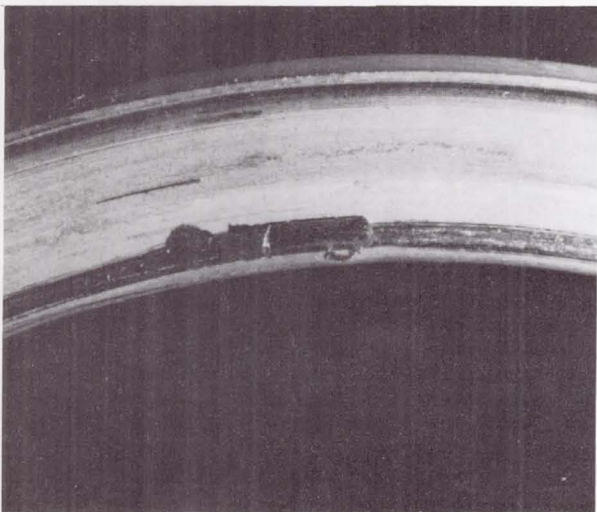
"K-seal" scuffed sealing lip caused by dry assembly
